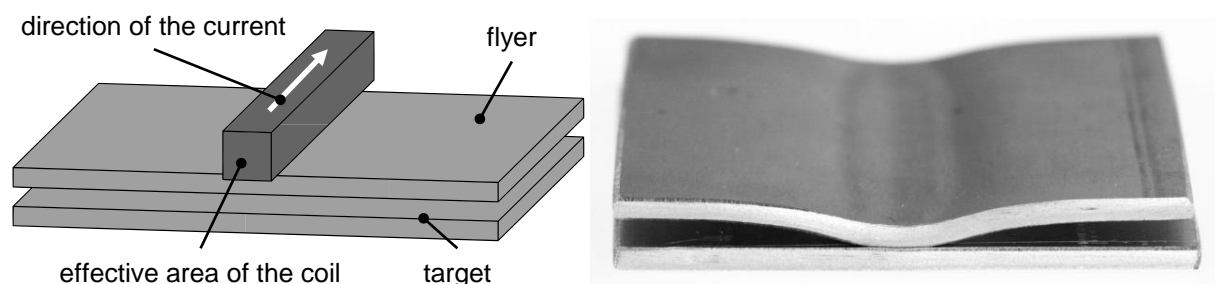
A simple setup for electromagnetic pulse welding (left) and photo of a joined specimen (right).
